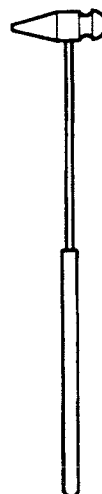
Special Tools and Equipment (Sheet 5 of 6)
